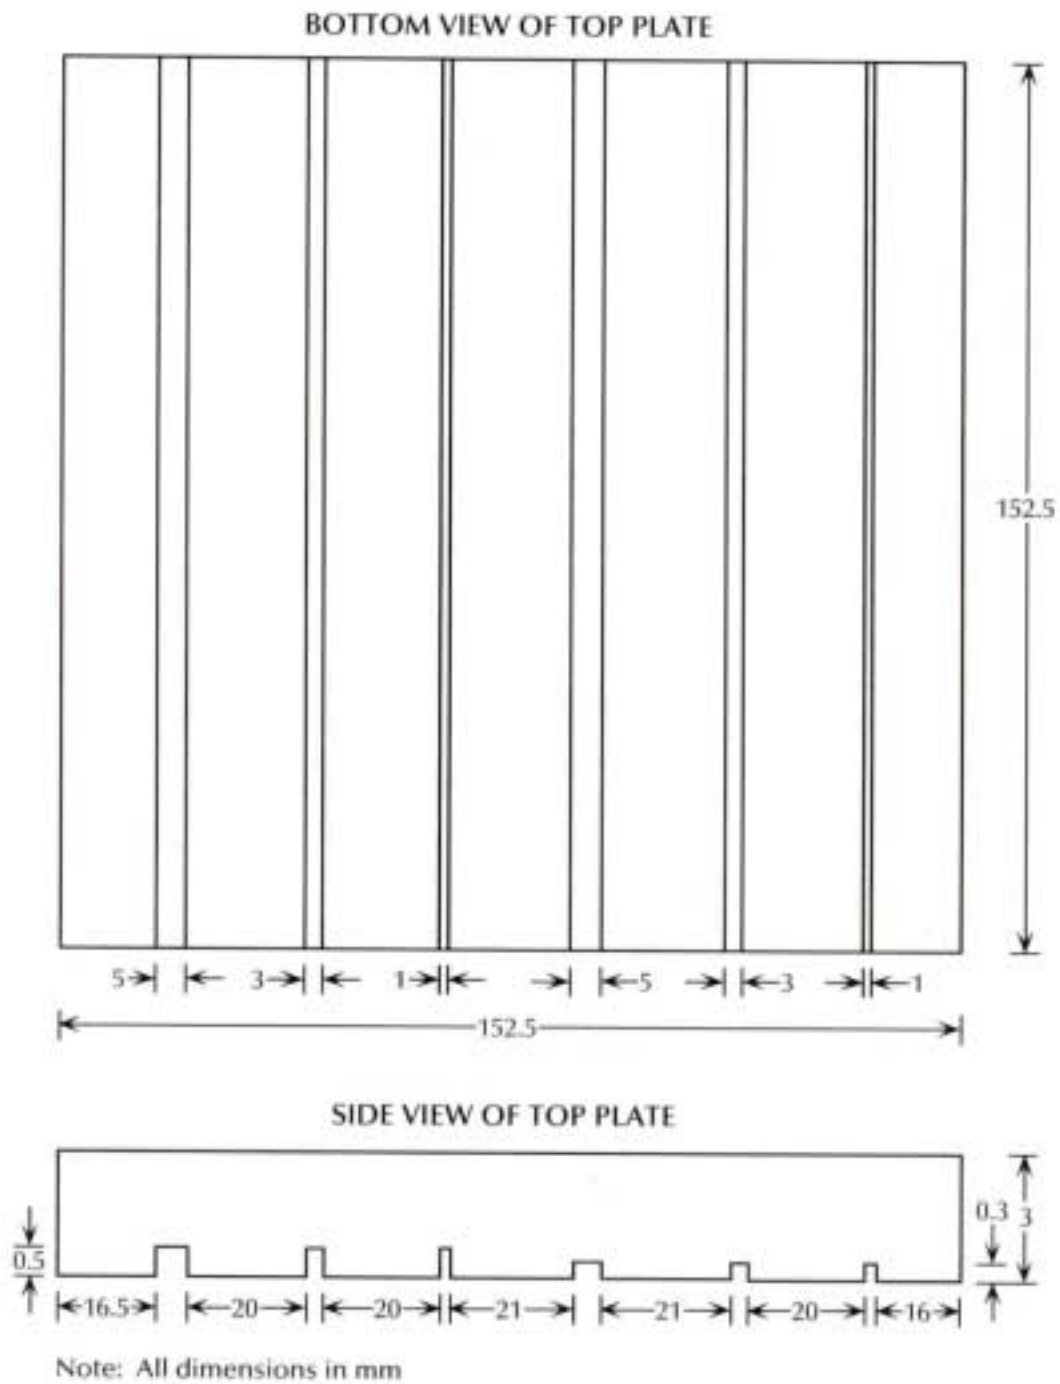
Schematic of top piece of machined aluminum flaw plate #3 with six flaws.
